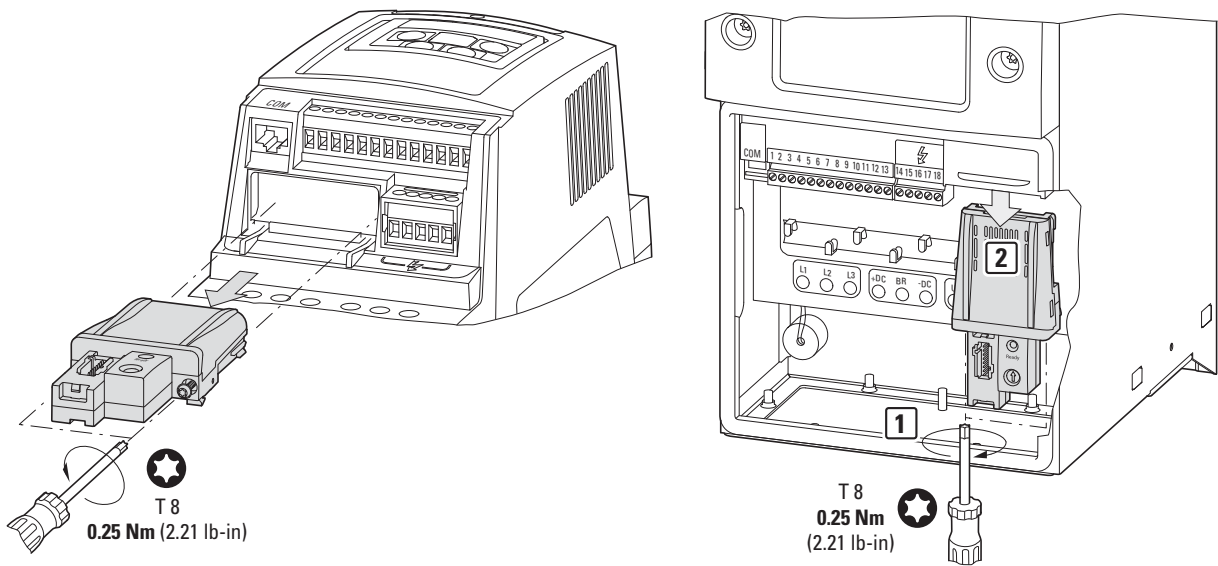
Removing a DX-NET-SWD1 interface module (left: IP20, right: IP55)
